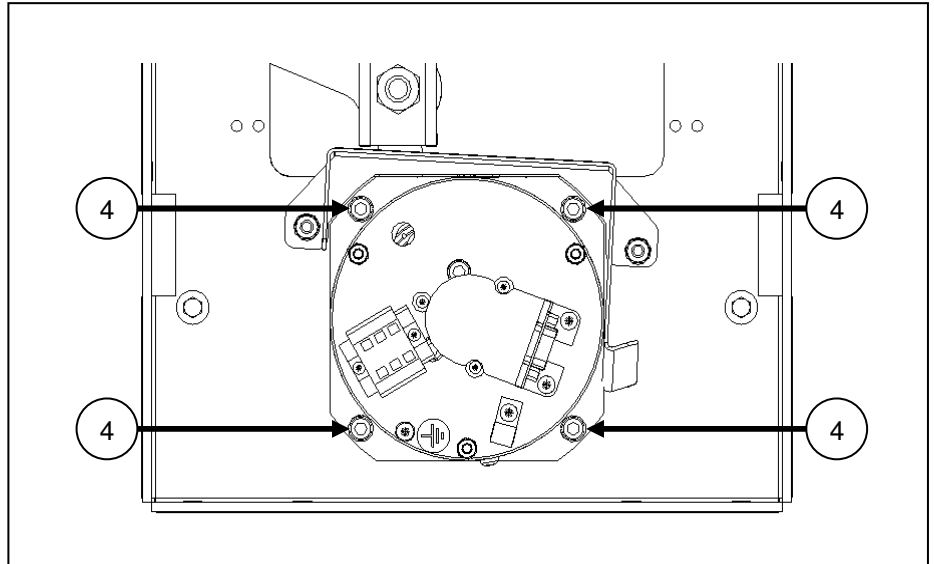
View of rear of the drive unit, motor mounting screws
